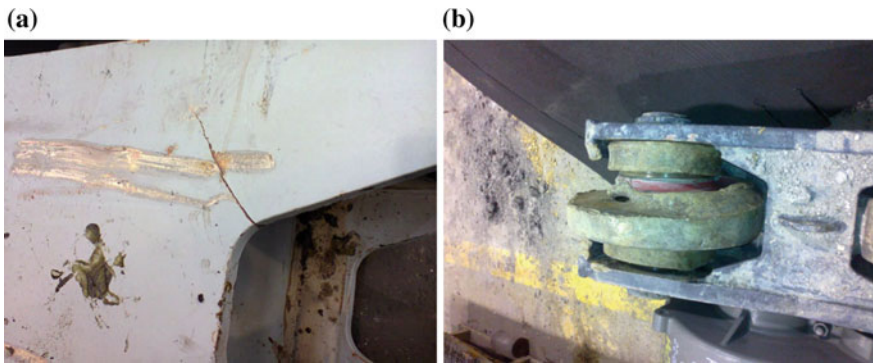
Examples of damage: a fractures of the lower flange of a spreader’s bogie; b damaged bogie wheel in the undercarriage of a bucket-wheel excavator
